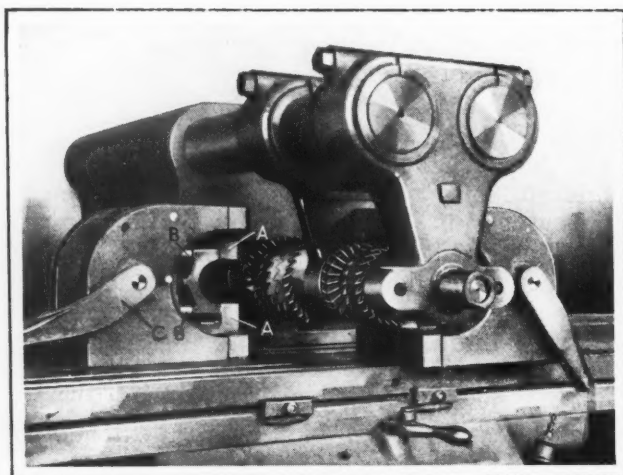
Slitting Two Castings into Six Bearing Caps, and at the Same Time Face-milling the End Caps
